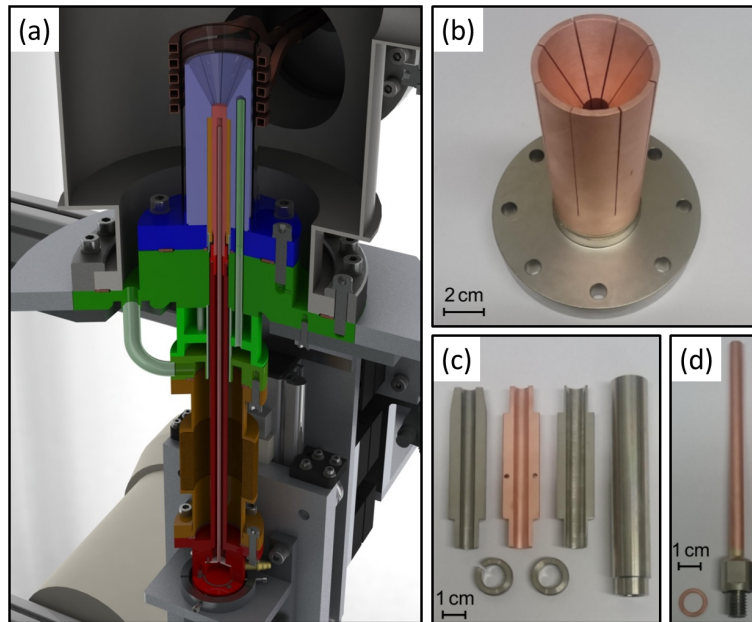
The rod casting furnace (RCF). (a) Coloured-shaded CAD depiction of the central parts of the RCF. Hukin crucible (blue), mounting flange (green), casting mould located inside the crucible (orange), bellows (brown), and casting rod (red). (b) Photograph of a Hukin crucible. (c) Photographs of various casting moulds. (d) Photograph of a casting rod with copper seal. Figures adapted after Refs. [24, 118].
